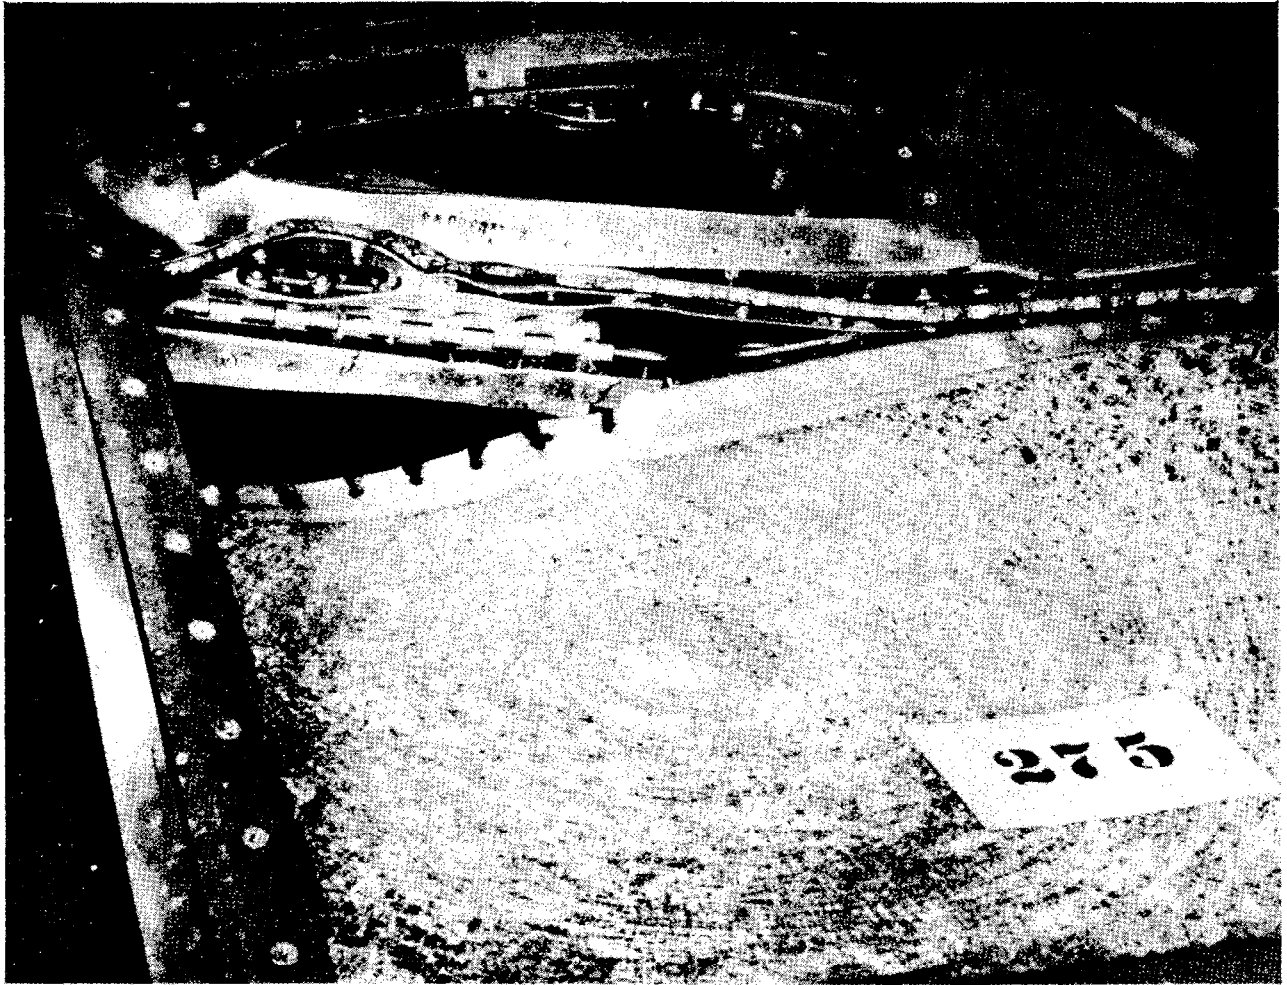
Example of Failure Resulting From Impact Test Where Plastic Edge and Metal Insert Sheared at the Mounting Bolts
